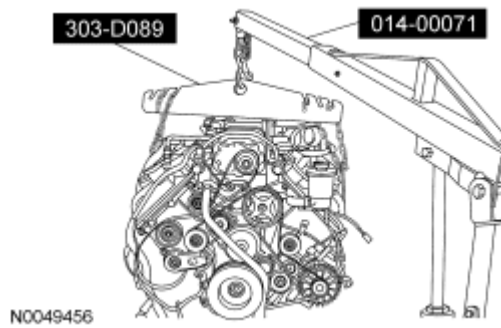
Removing Engine From Work Stand Using Special Tools (303-D089) & (014-00071)
